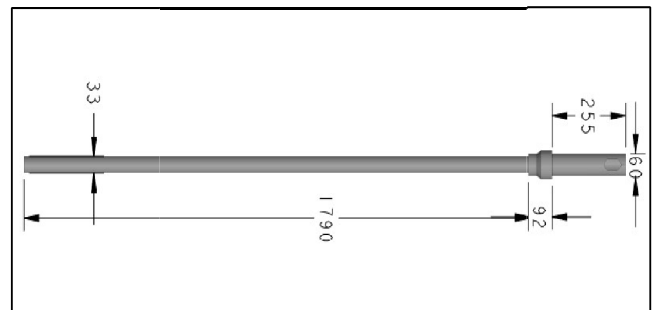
Front view of the Drawing of the Developed Harvesting Device.
